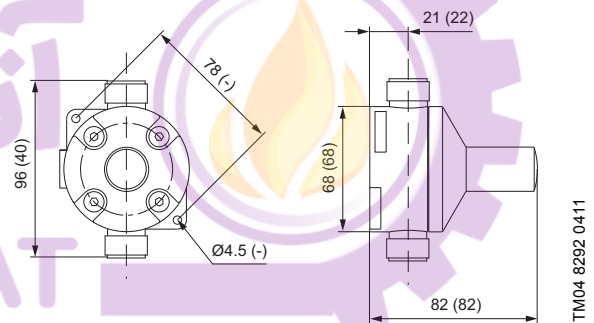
Pressure loading valve. Dimensions in brackets apply to stainless-steel version.
